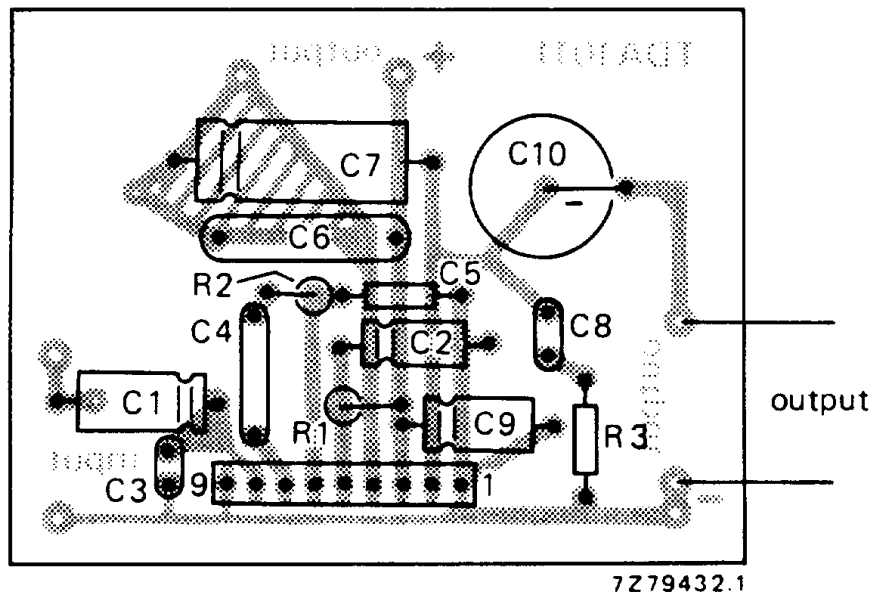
Component side of printed-circuit board showing component layout used for the circuit of Fig.4.
